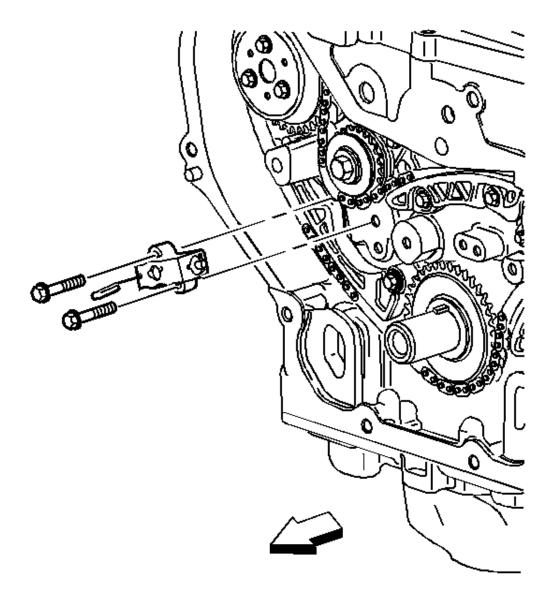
View Of Adjustable Balance Shaft Chain Guide Courtesy of GENERAL MOTORS CORP.
